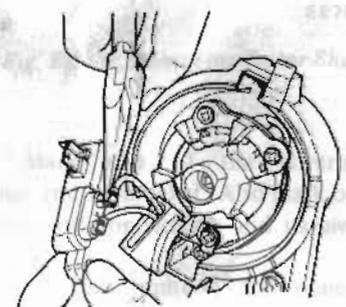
Disconnecting Pick-up Coil Terminal
